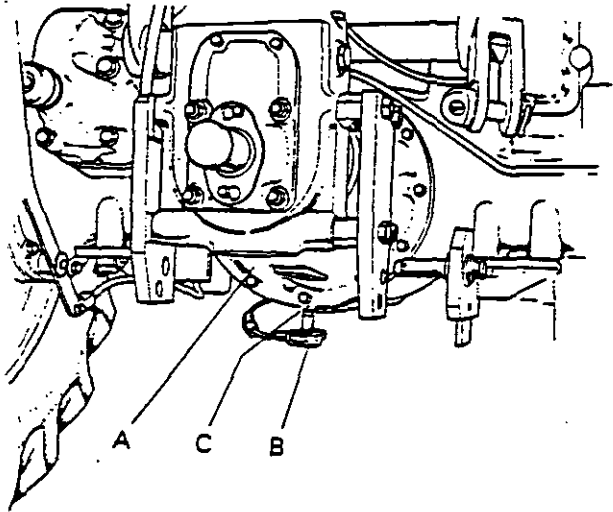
REMOVING OIL FILTER SWITCH ADAPTOR
